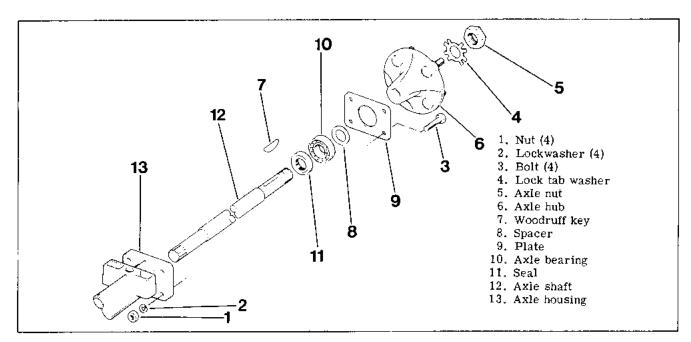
B-32. Rear Axle (Late 1977 and Later) - Exploded View
